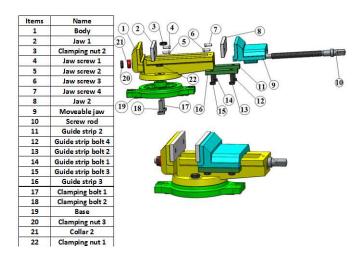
CAD model and nomenclature of swivel vice assembly.
